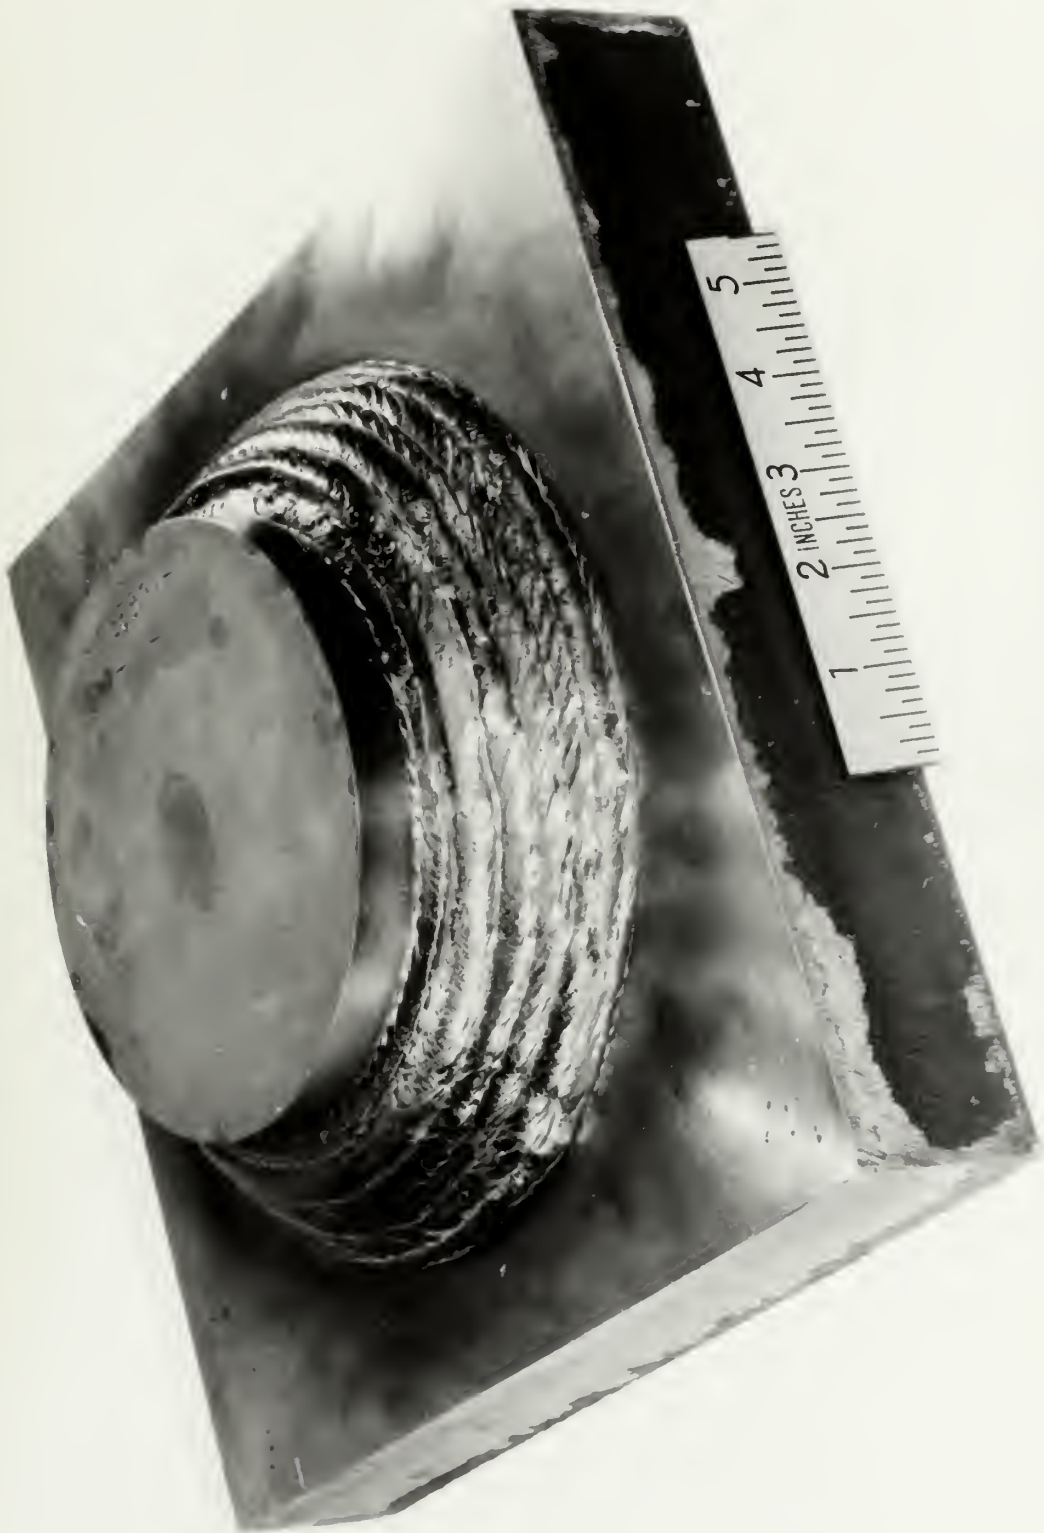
Naval Circular Fillet welded Specimen.
